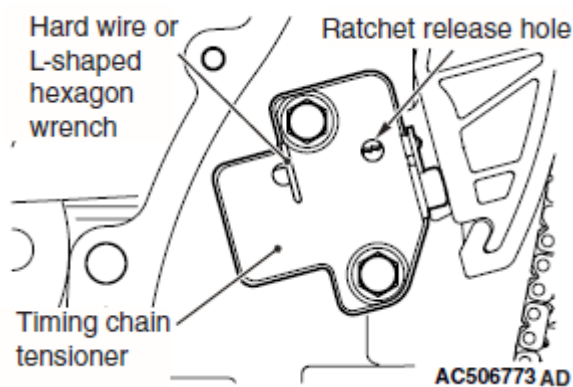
Identifying Timing Chain Tensioner And Hard Wire Or L-Shaped Hexagon Wrench
